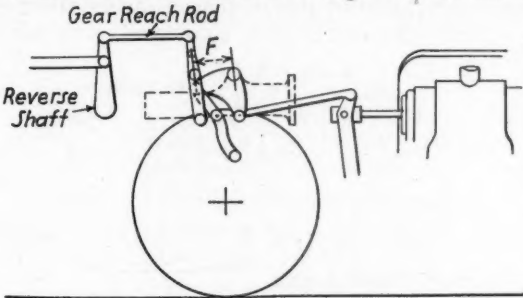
Position of reverse yoke when gear reach rod is adjusted properly
